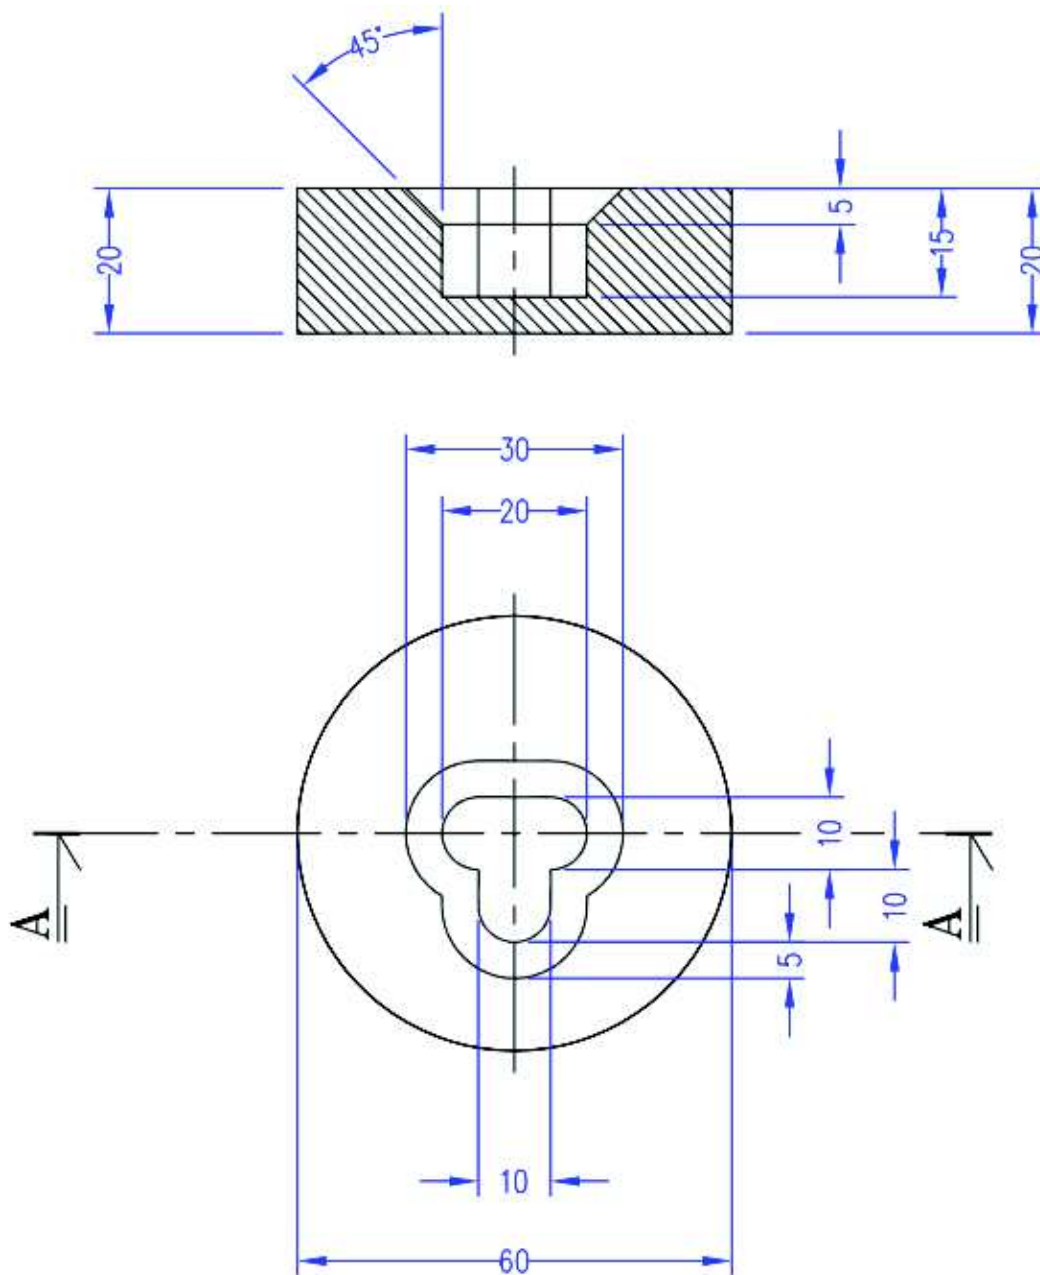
Technical drawing of the bottom part made in polystyrene with quotes.
